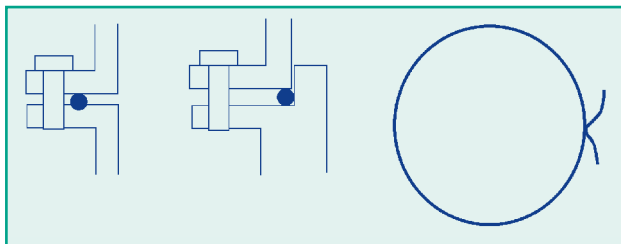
Indium seals; face seal, corner seal and loop showing ends of wire crossed
